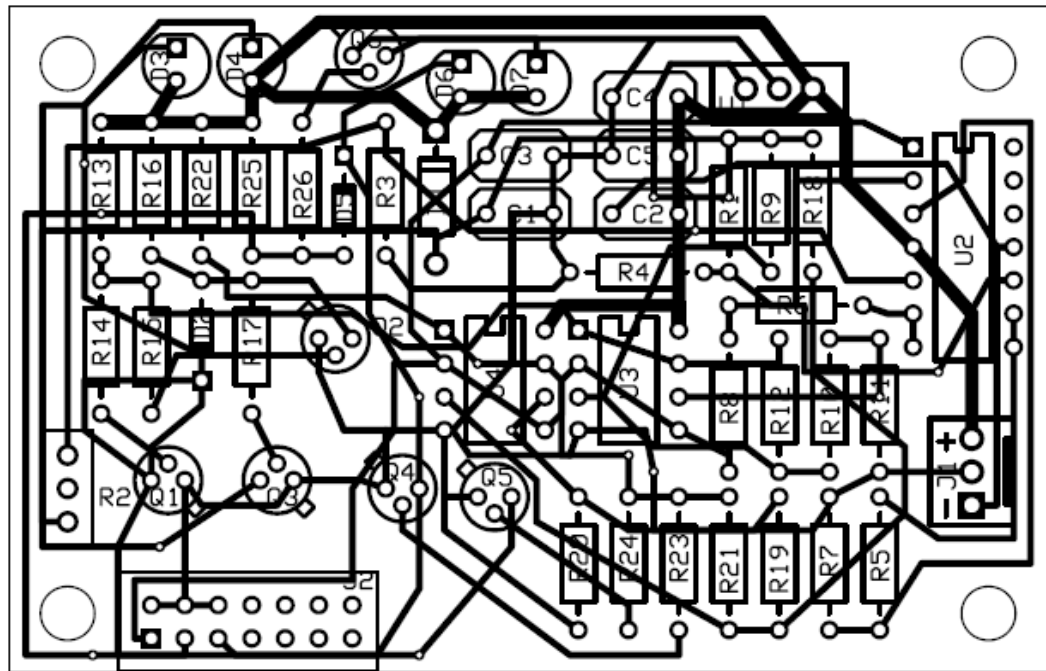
Circuit board layout showing top copper layer, bottom copper layer, silkscreen, pads, and part labels
